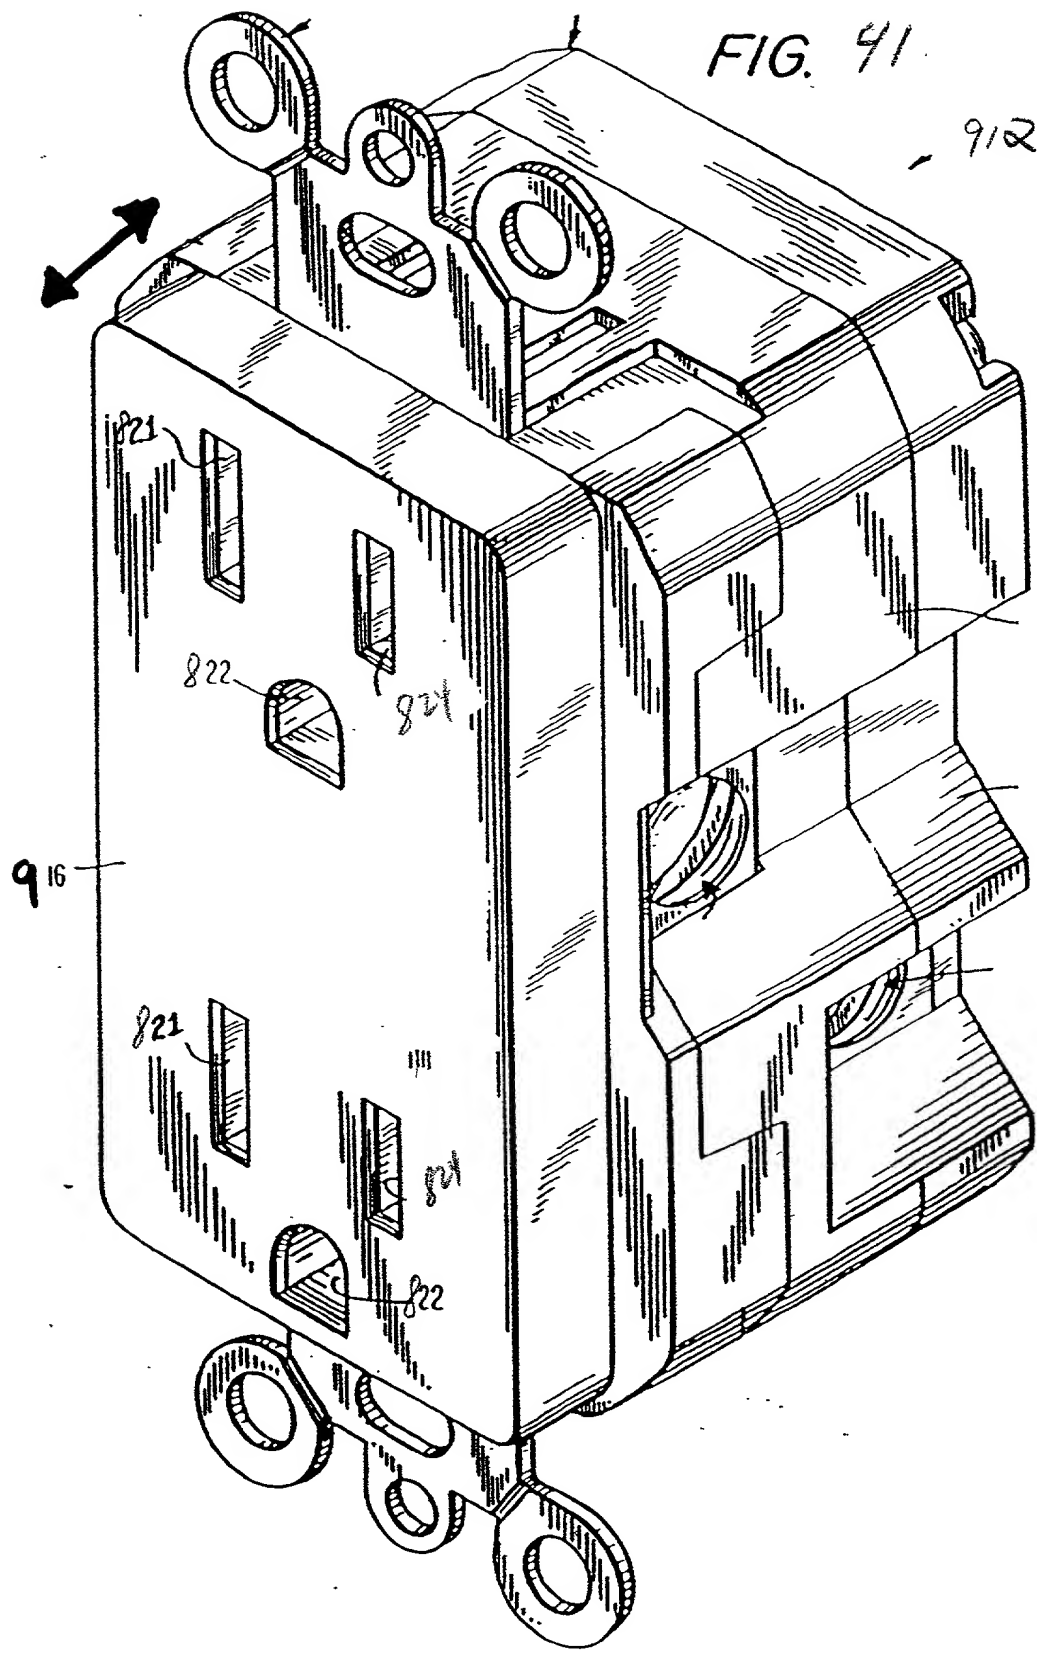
is a perspective view of the assembly 912, showing the main body 916, the top mounting features, the front ports 821, the semi-circular features 822, and the side structure.
